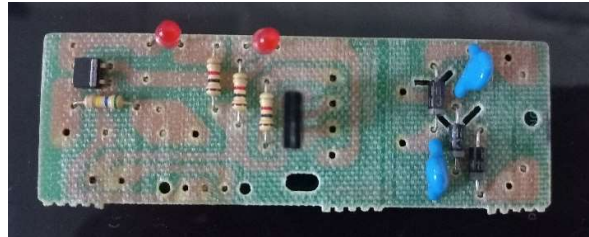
The high voltage circuit PCB, with unnecessary components removed.
